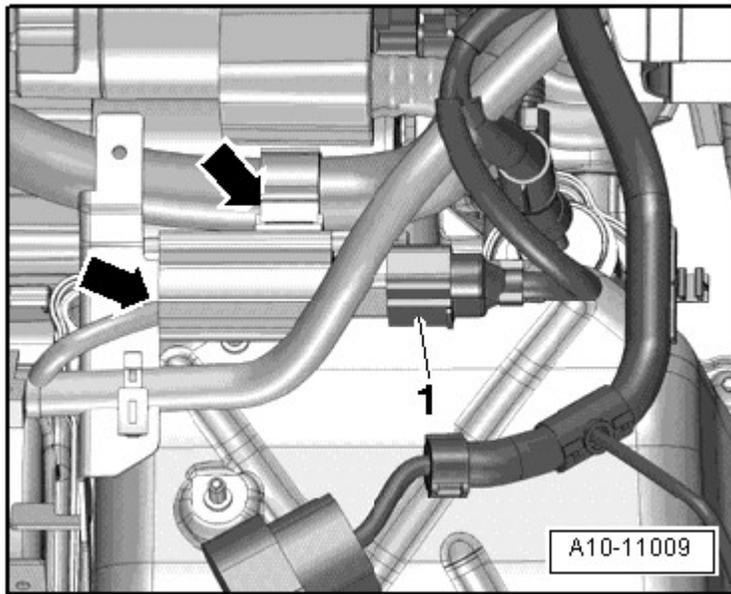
Identifying Wiring Harnesses And Connector On Hot Side Charge Air Pipe
